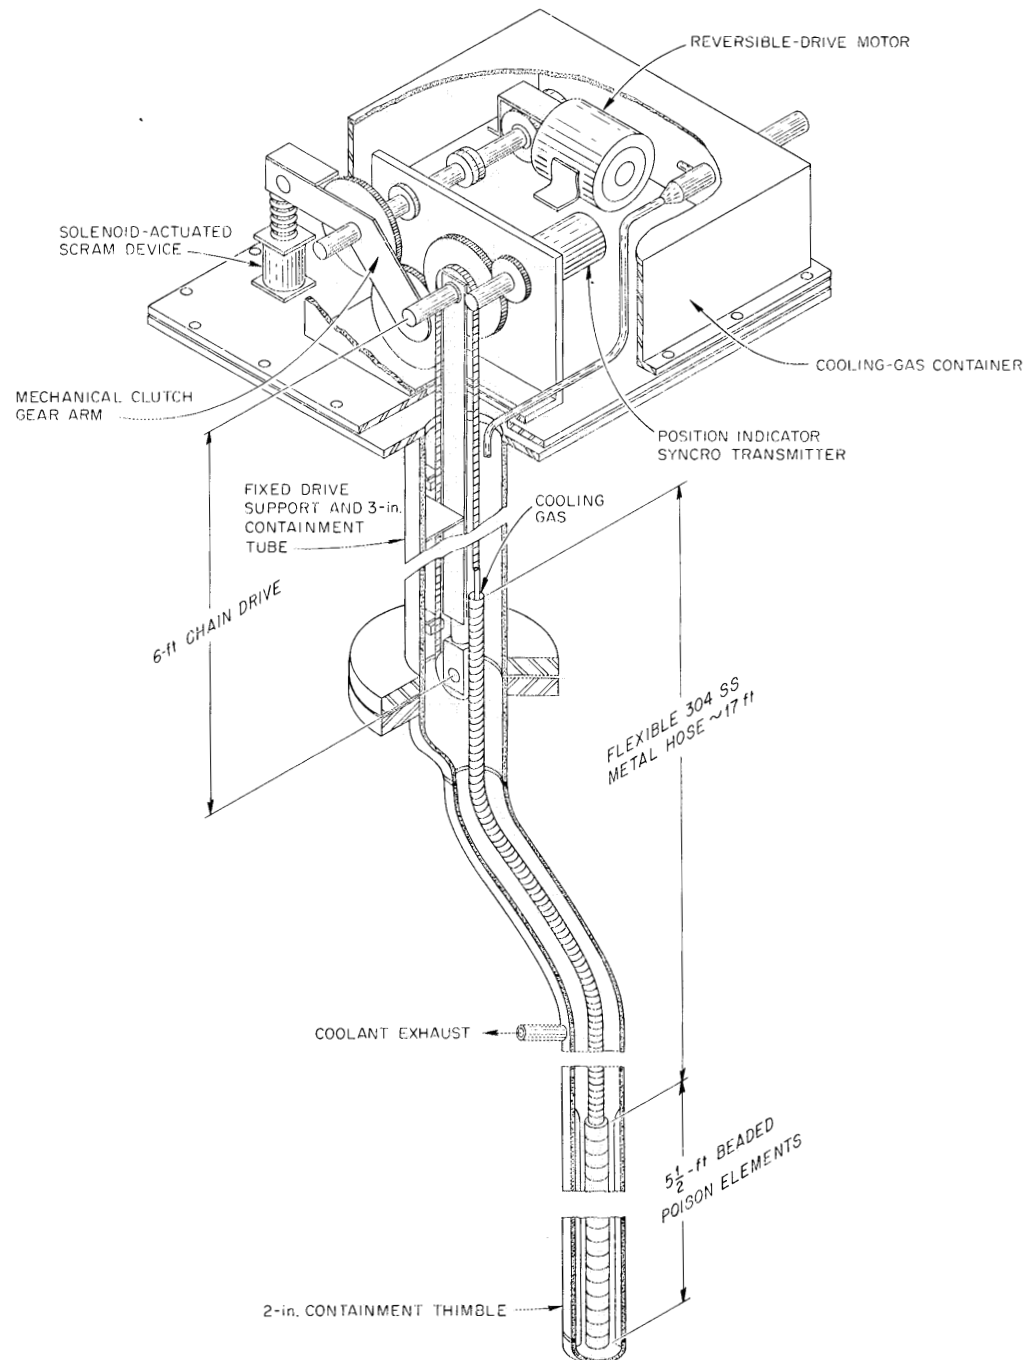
MSRE Control-Rod-and-Drive Assembly.
